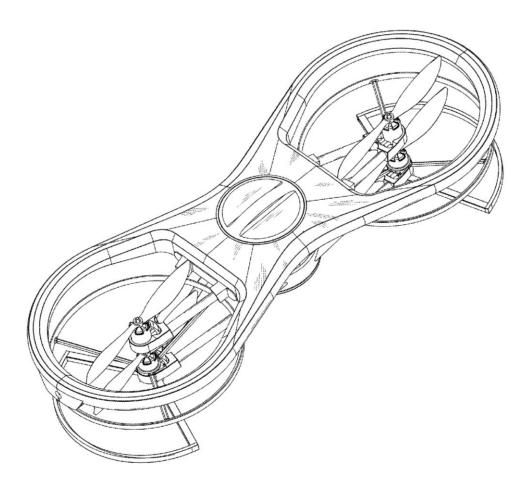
3D drawing of USD747775S with propellers lined up. [3]
